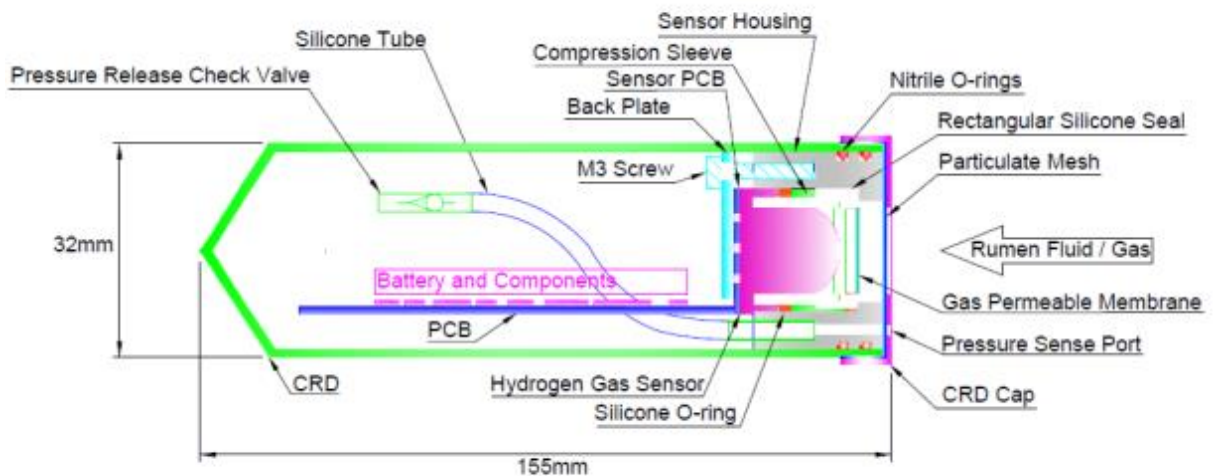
Detail parts of the current H₂ IR gas-sensor device assembly
